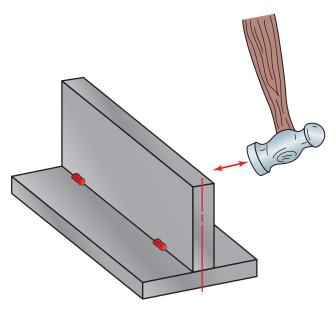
A hammer can be used to adjust the parts into squareness, if needed.
